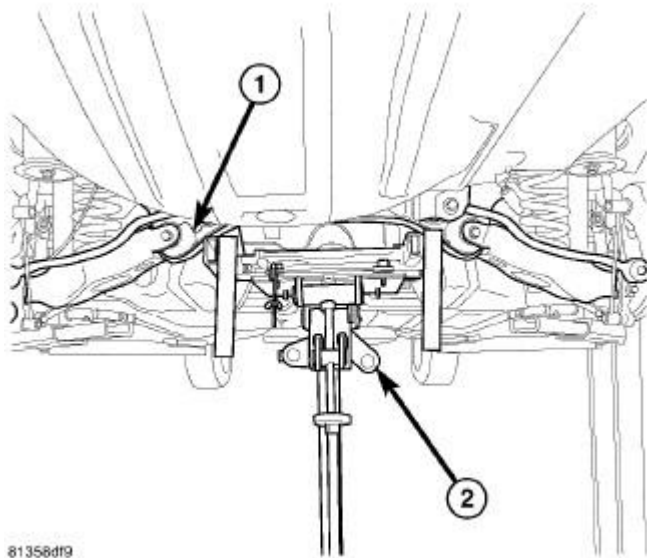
JACK POSITIONED BENEATH CROSSMEMBER
